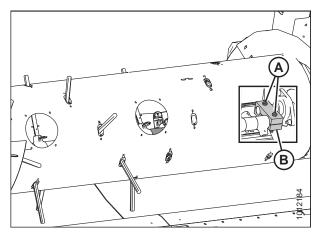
Left Side Auger Finger Support Clamp — Cutaway View Shown
